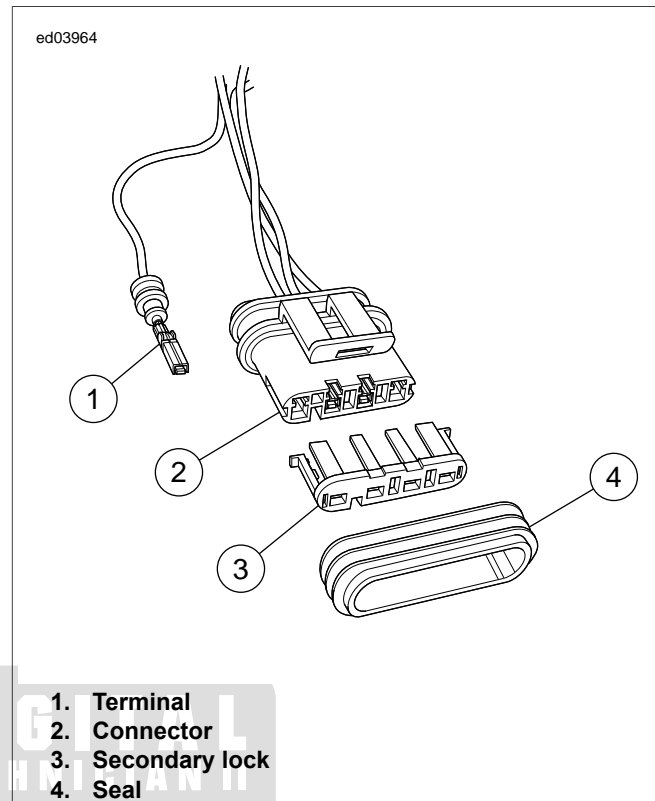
Tyco SuperSeal 1.5 Sealed Connector
